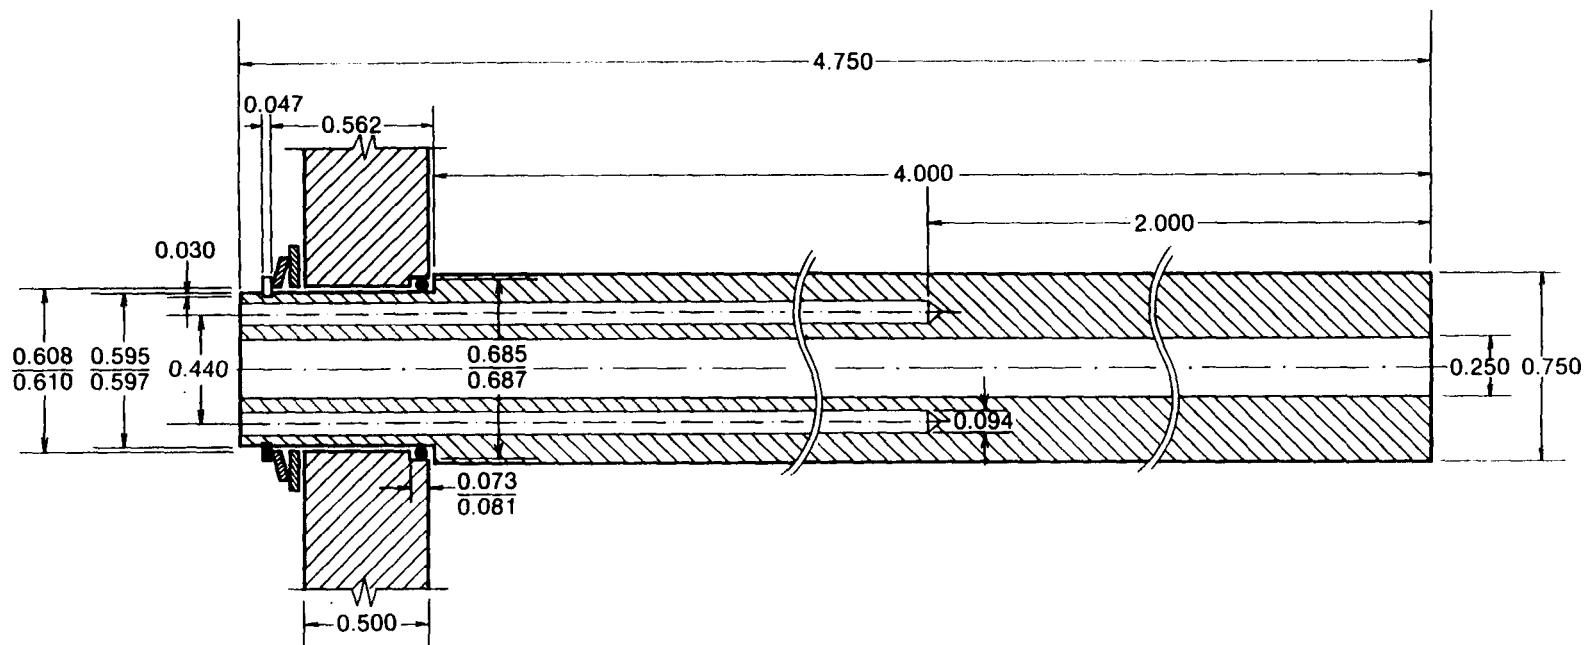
Dimensions (in inches) of a mounting arrangement,
